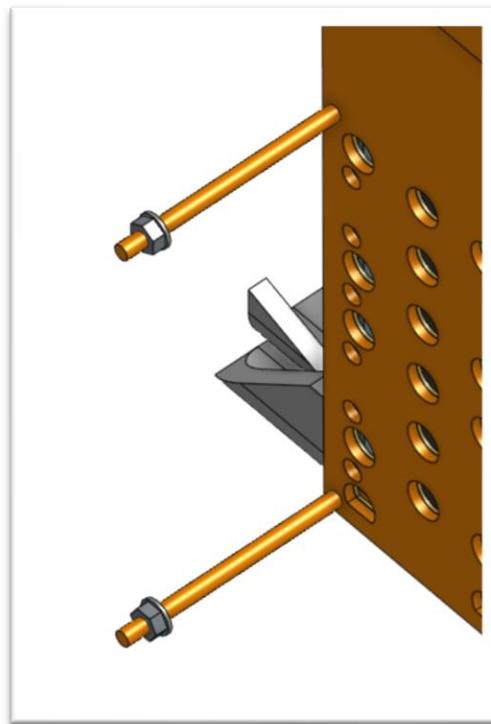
Accumulator fan mounting design using welded threaded aluminium rods
